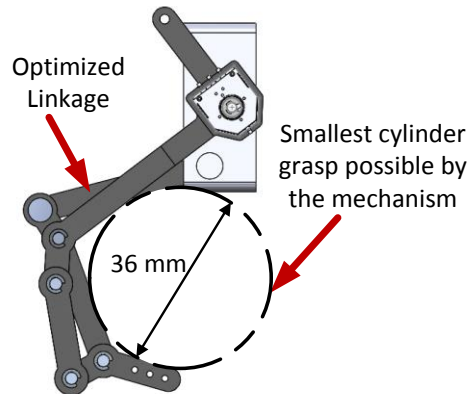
Smallest cylinder fit possible for the optimized linkage mechanism
